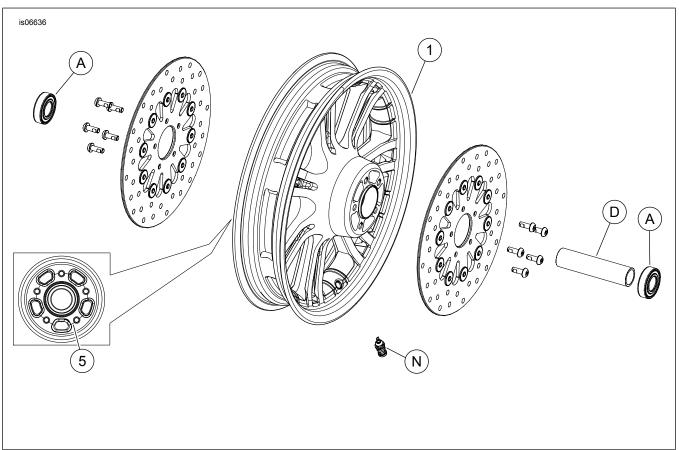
Service Parts: FRONT 14 SPOKE WHEEL KIT
